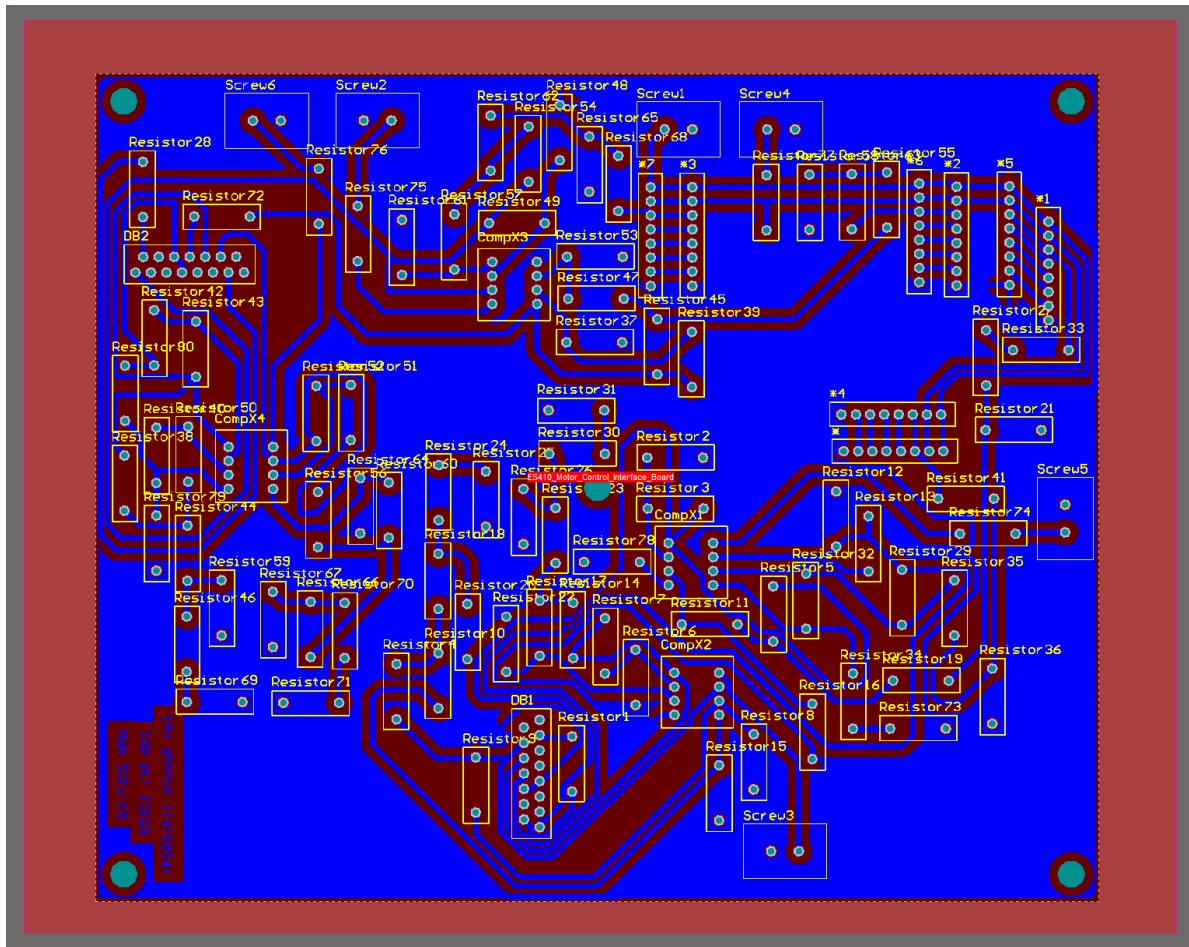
Motor Control Interface Board Footprint (15 cm × 18 cm)
